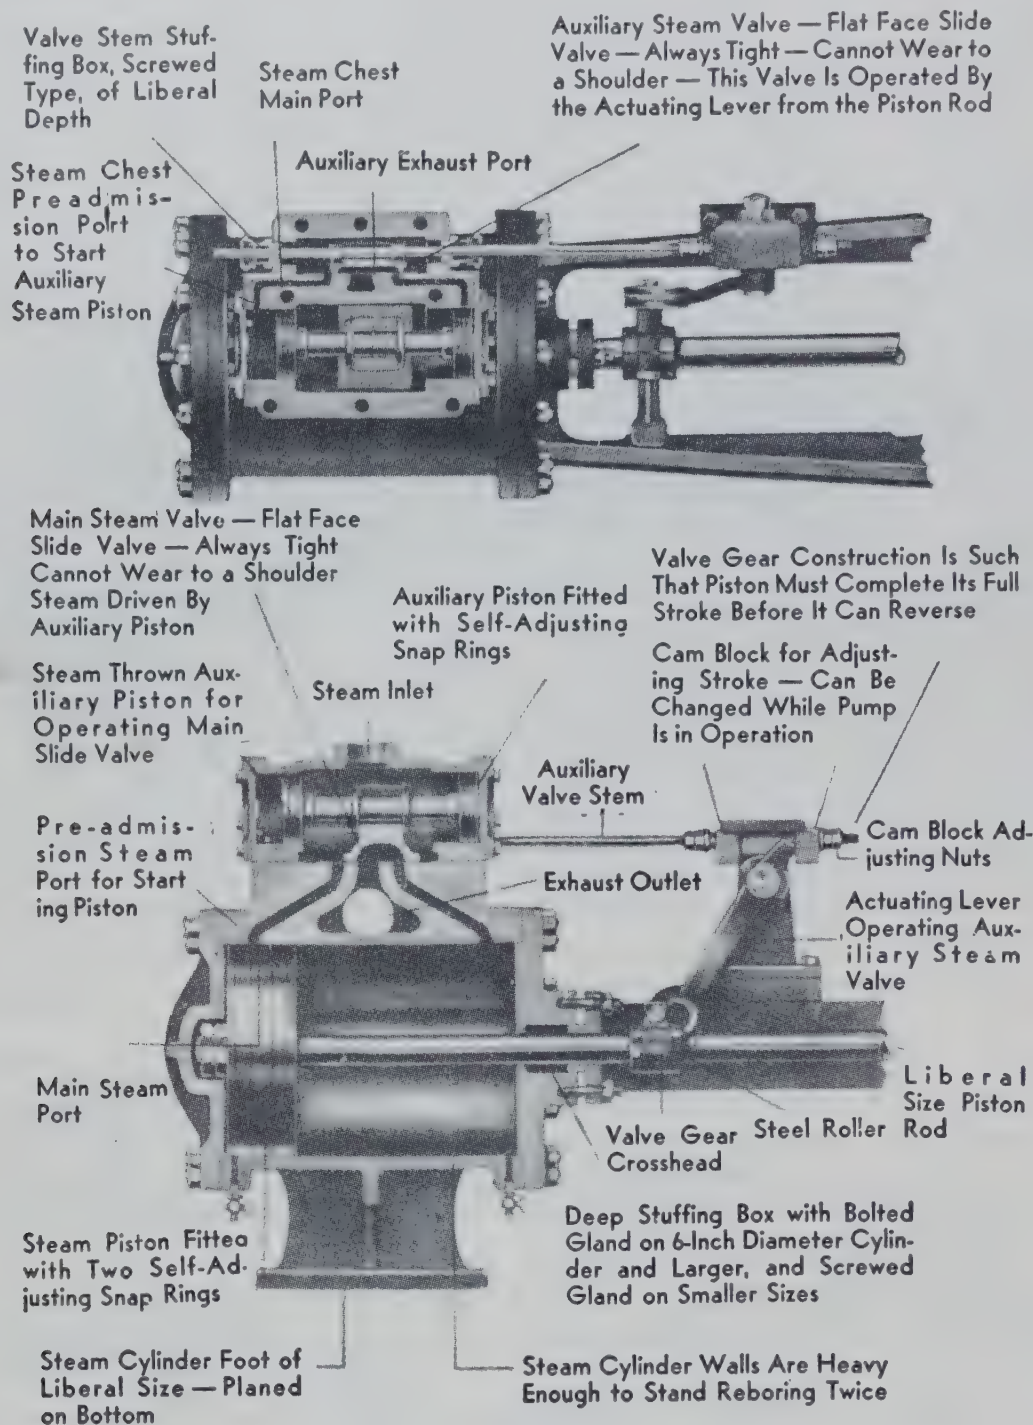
Cutaway view of steam end of reciprocating pump with steam actuated steam valve. (*Union Steam Pump Co.*)
